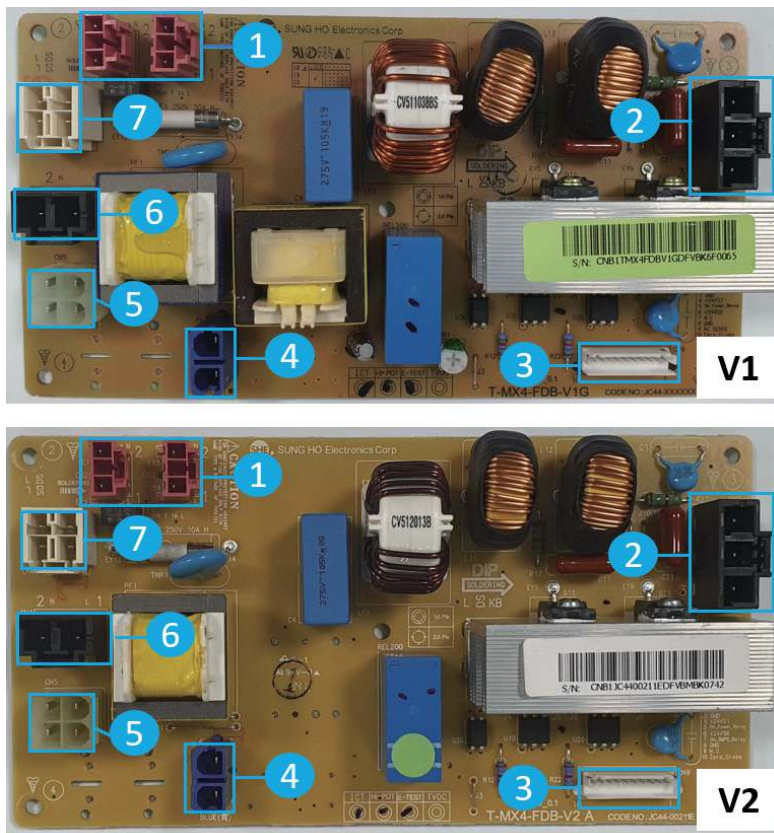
Fuser drive board (FDB) (For 78323, 78325, 78330)
